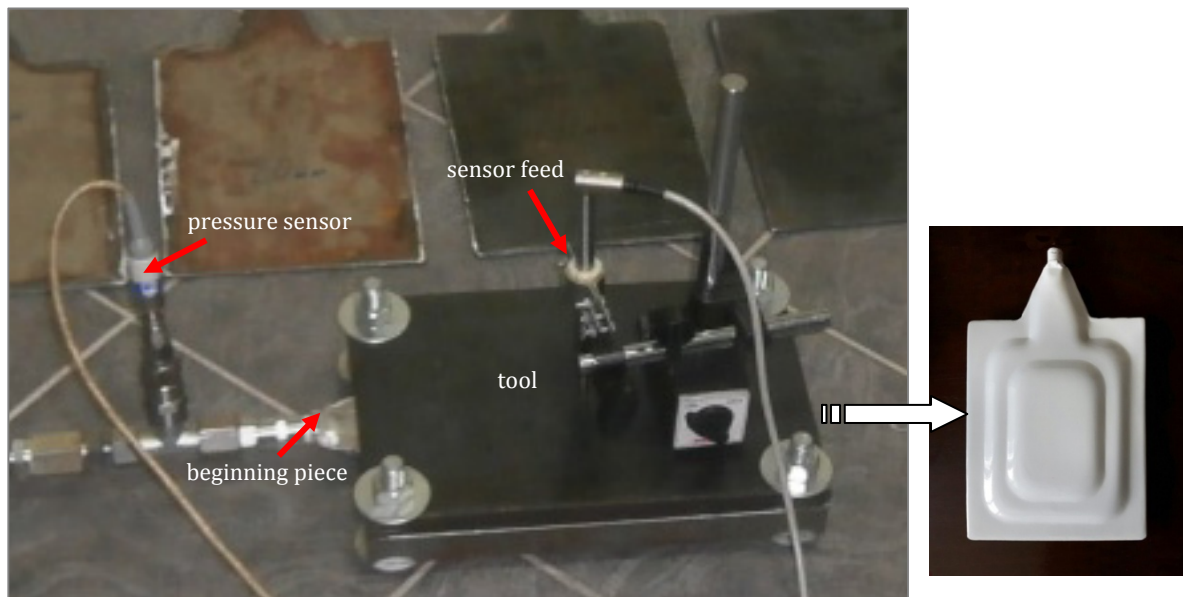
The position of sensors during hydroforming of welded sheets and shaped piece
